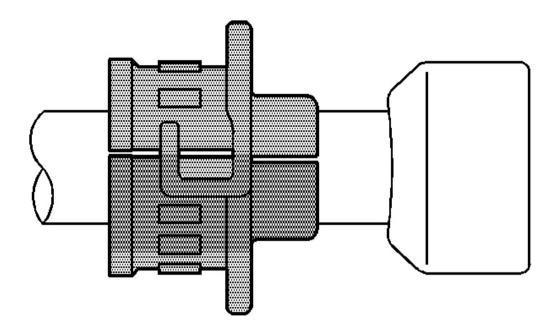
TOC Connection & J 44827 Courtesy of GENERAL MOTORS CORP.
